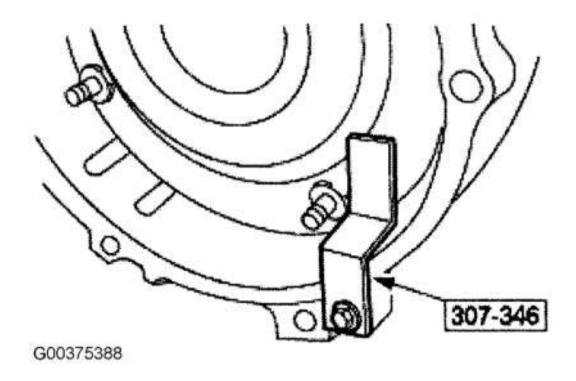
Identifying Torque Converter Holding Tool (307-346) Courtesy of FORD MOTOR CO.
